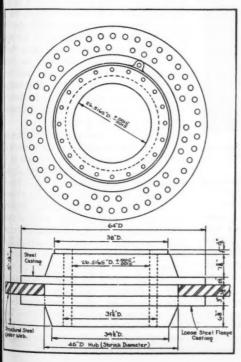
Drawing of Bascule Bridge Girder Bearing Hub For Shrewsbury River Bridge.
